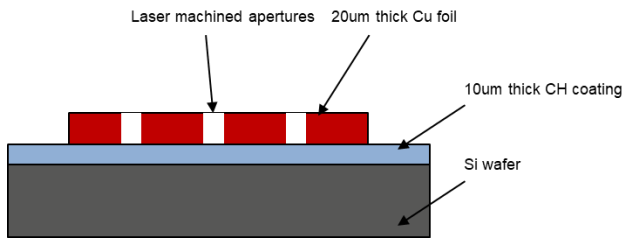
The second iteration of improvements to the Cu/CH washer assembly; adhering the Cu foil directly onto the CH coating prior to laser micro machining the washers.
